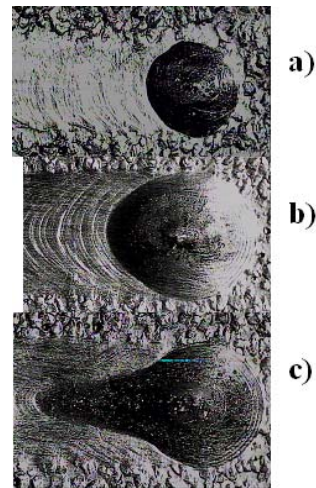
Crater obtained at the end of the welding process with the following forms: a) circular b) oval c) oblong
